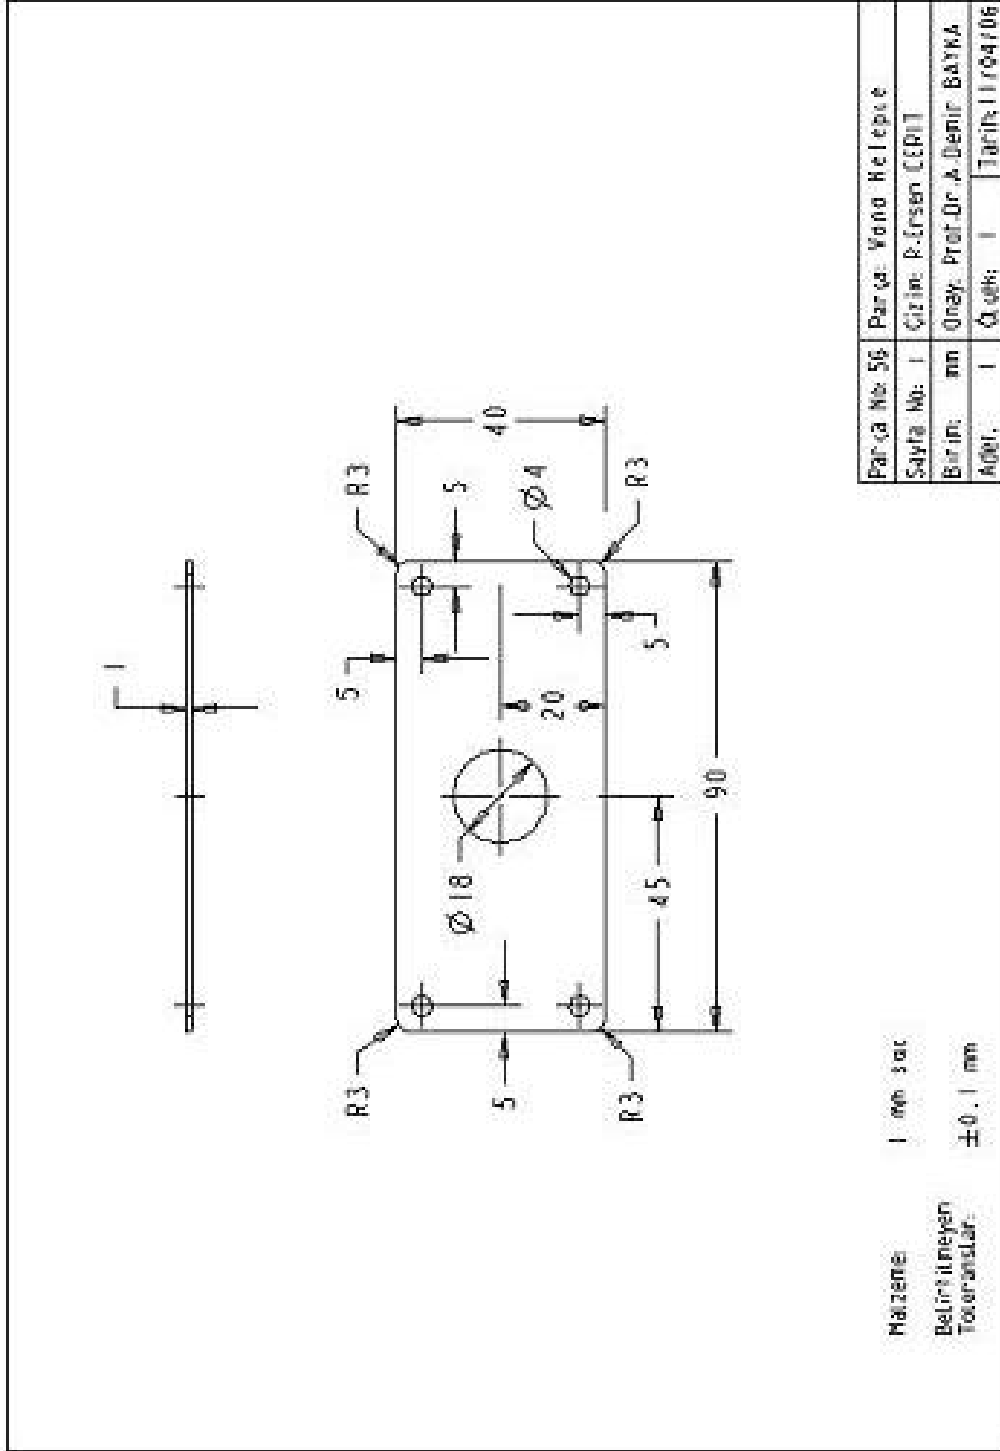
Technical Drawing of Valve Support on Indicator Board.
